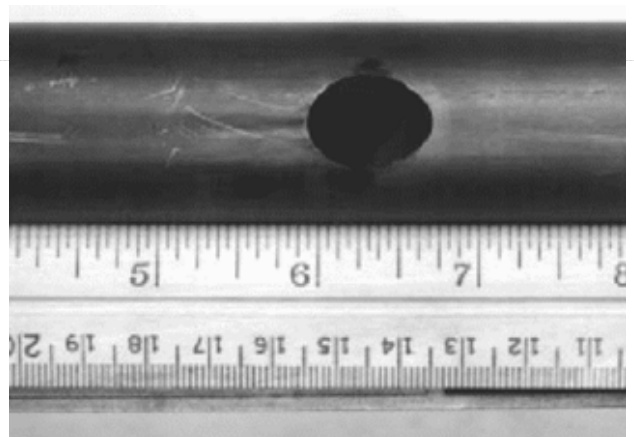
Unalloyed titanium tube perforated by pitting in hot brine.
